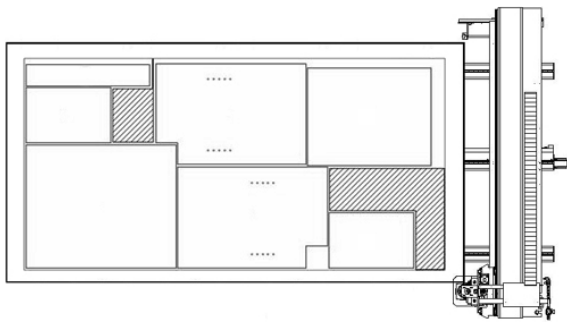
Nested Parts for CNC Cutting from Sheet Stock
